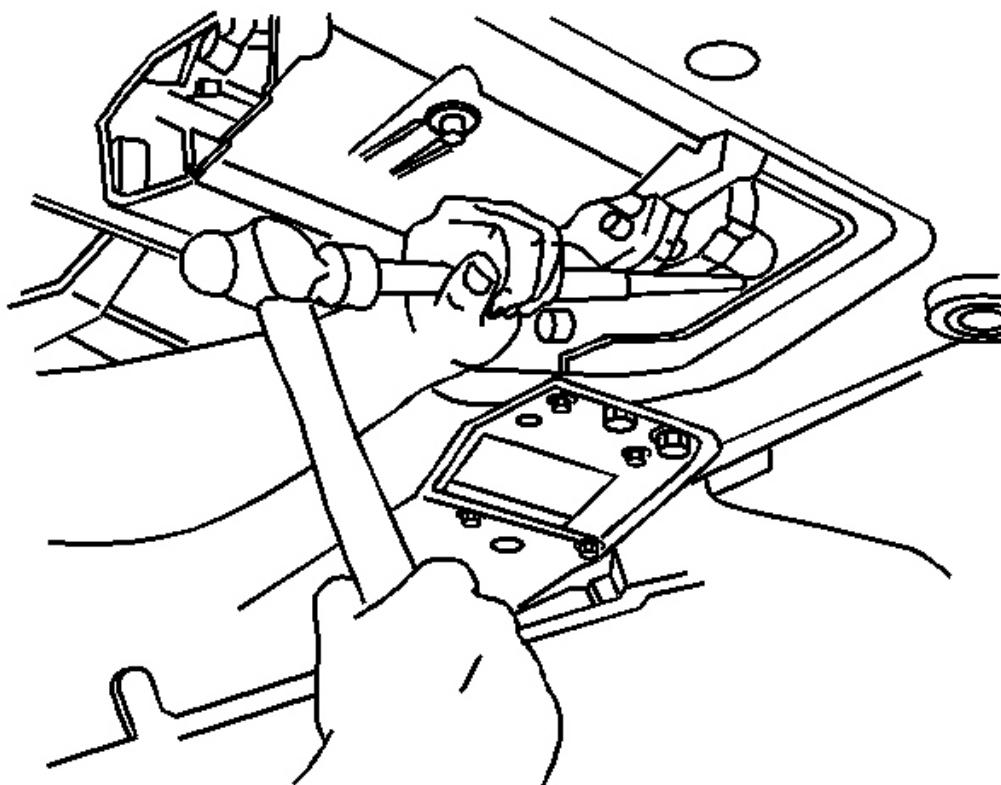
Removing Left Wheel Drive Shaft From Front Differential
